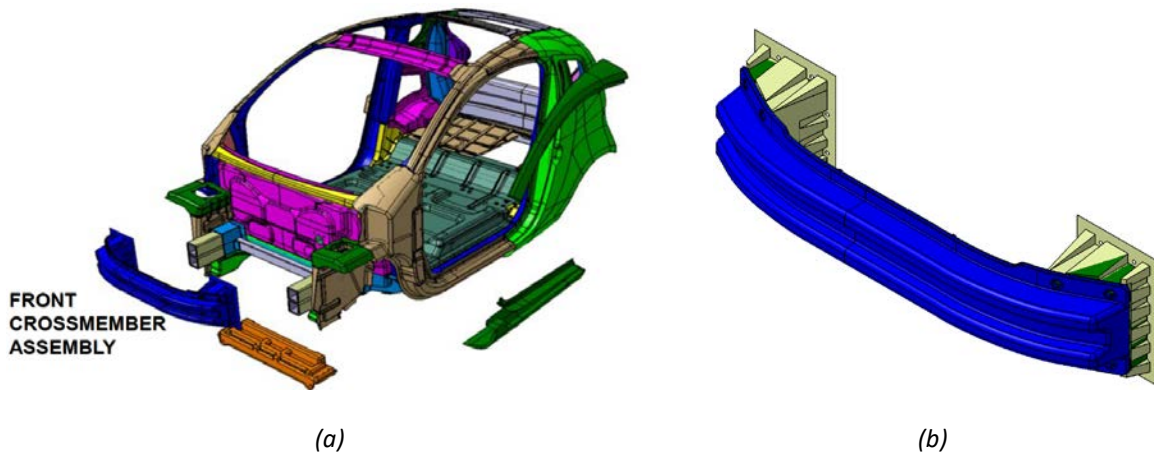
(a) Front cross-member assembly position in car design [7], (b) front cross-member assembly
